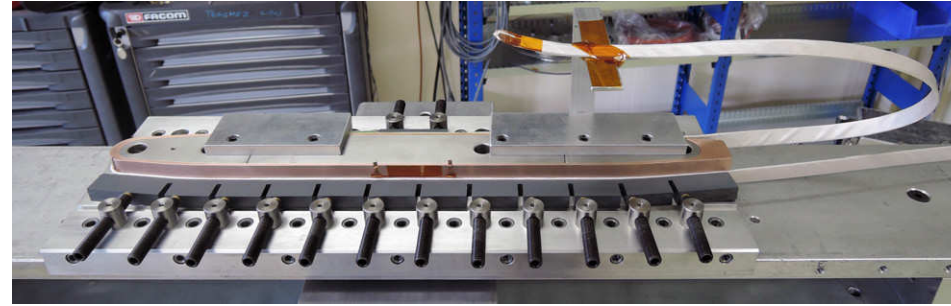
Winding of the Feather-M0.4 coil using real Roebel cable with the BHTS-1 layout, based on Bruker tapes and cable assembled at KIT.
